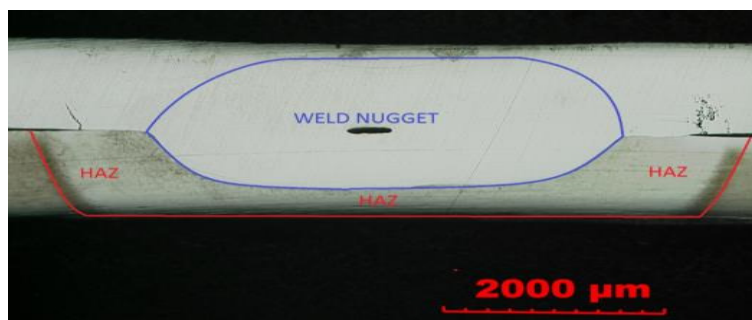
Resistance welding with process tape of high strength steel to stainless steel (Source: KULeuven)
